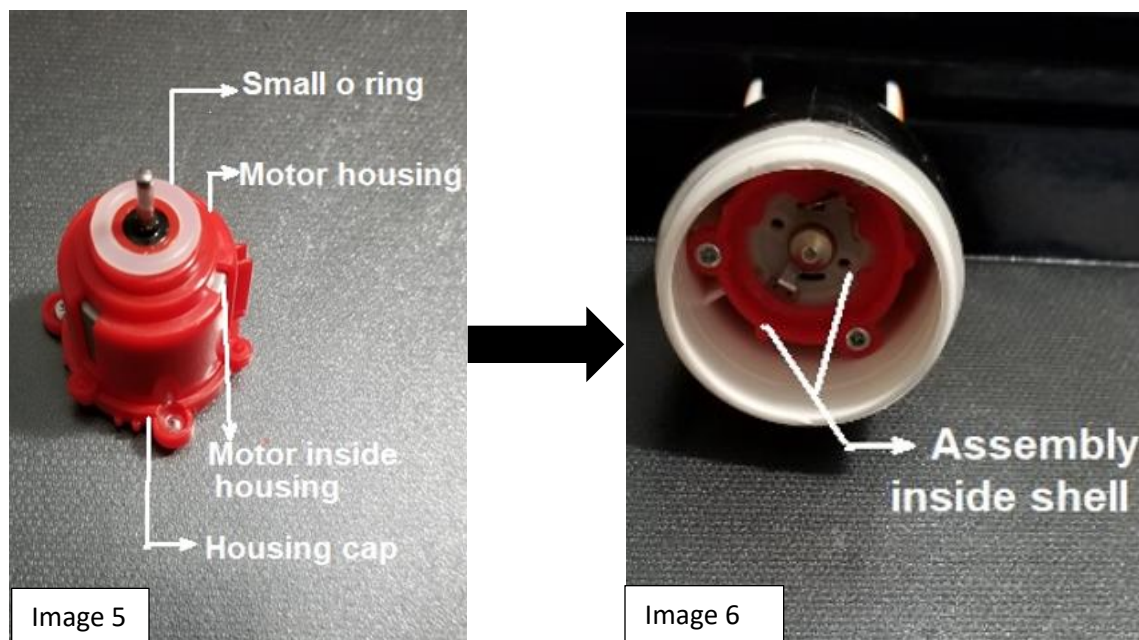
Showing motor assembly with O ring. Image 6: Displaying motor assembly inside the rear outer shell.
